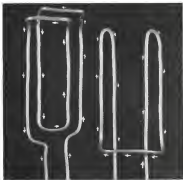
Multiple-turn induction coil for welding machine. The coil is wound around a central core and is connected to a power source.
